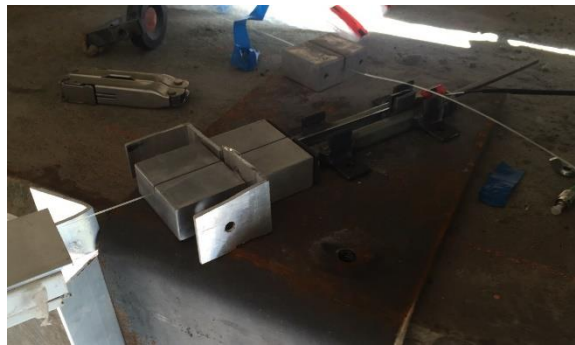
Sensor Cable in Clamping System with Tensioning Tool
